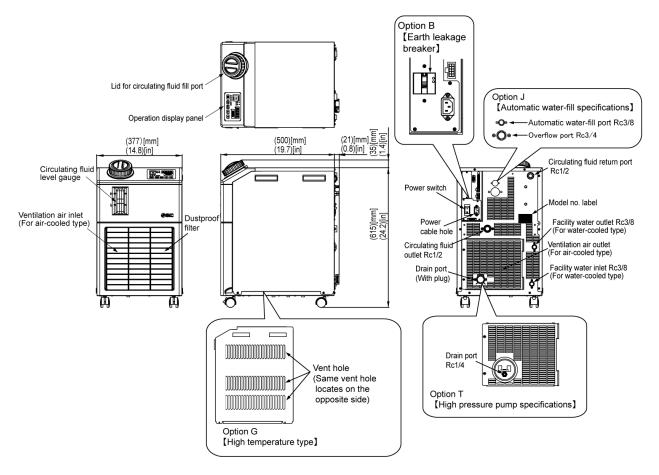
Outline Dimensions (HRS012/018/024-\*\*-\*)
